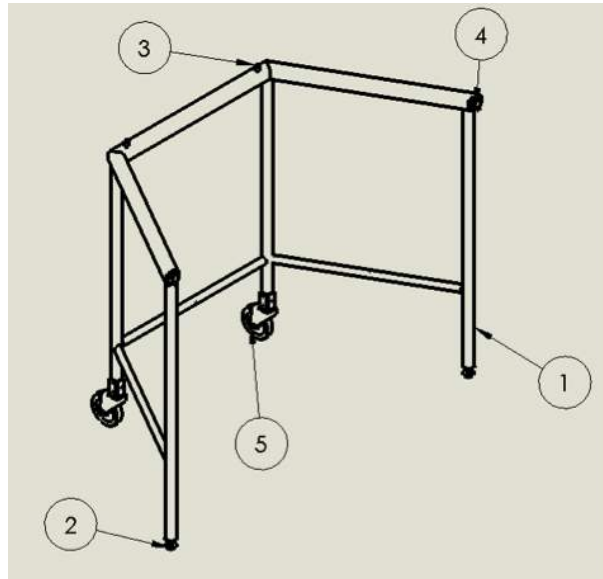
Isometric view of the frame with components labeled as follows: 1-Welded Frame Assembly, 2-Leveling End Cap Assembly, 3 - Locating Pins, 4 - Latch Assembly, 5 - Caster Assembly.
